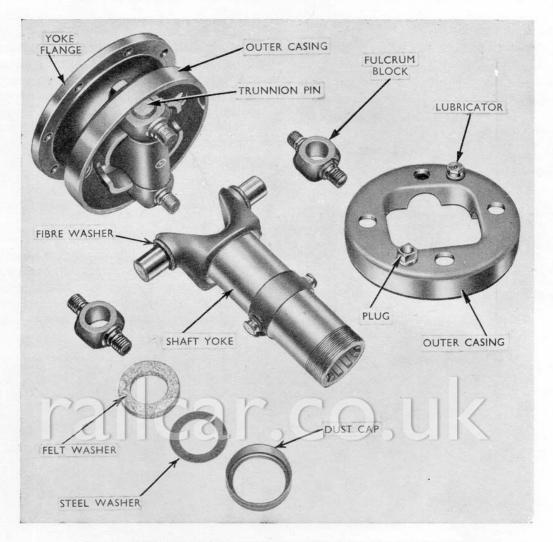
Exploded view of plain bearing type universal joint fitted to early cars.
